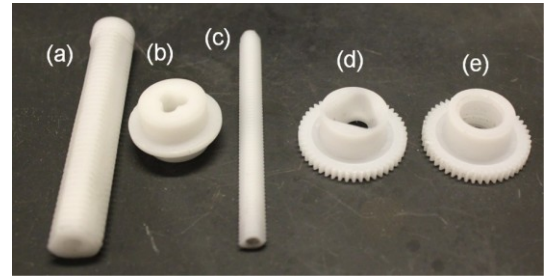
The fabricated parts: (a) screw-spline; (b) profiled top; (c) screw; (d) profiled nut; and (e) threaded screw-spline nut.
